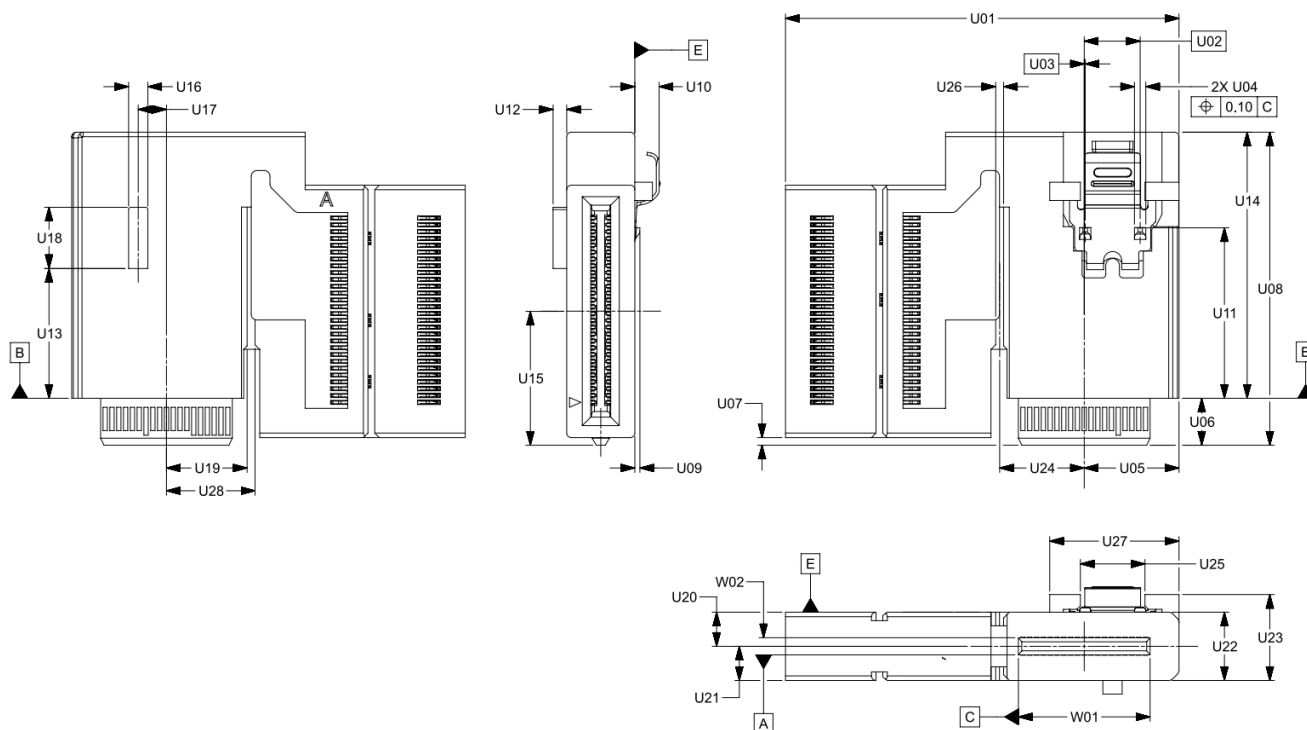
Dimensions of 38-Pin Style B Connector Plug E1-1C
